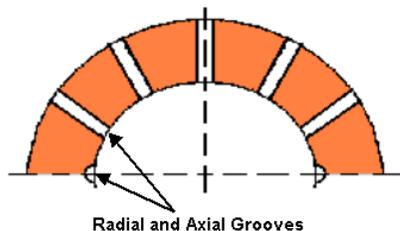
View of Axial Thrust Bearing Plate. Circulation Through Groove Essential to Lubricate Bearing.
